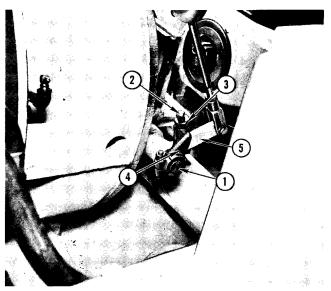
PEDAL FREE TRAVEL 1. Release Bearing Cross Shaft
